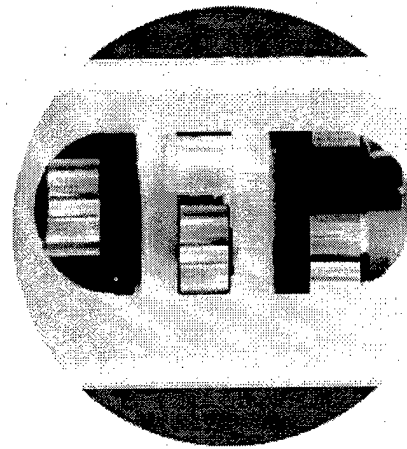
Three-stage planetary gear with housing opened for visualization.
